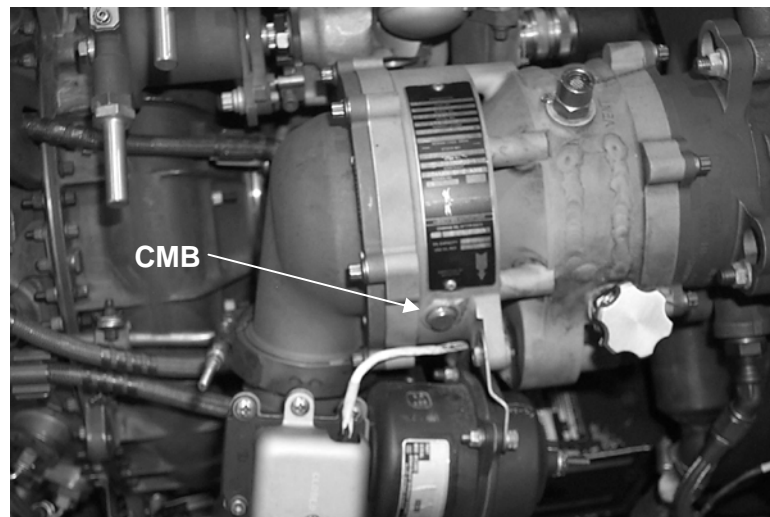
Engine Starter (AH-64A/D) with CMB Installed
